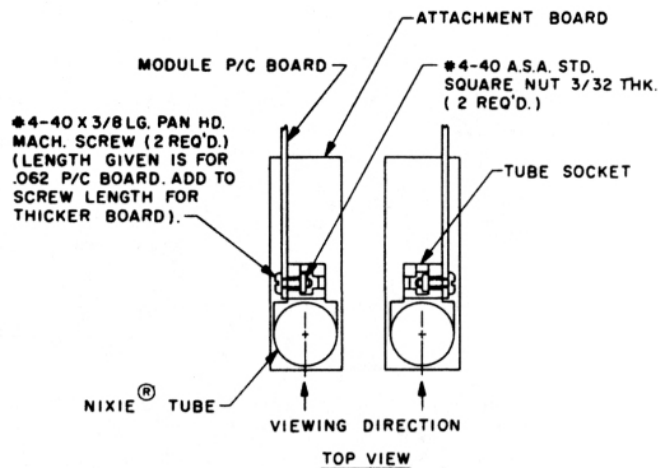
DRIVER MODULE BOARD RIGHT OR LEFT SIDE MOUNTING
